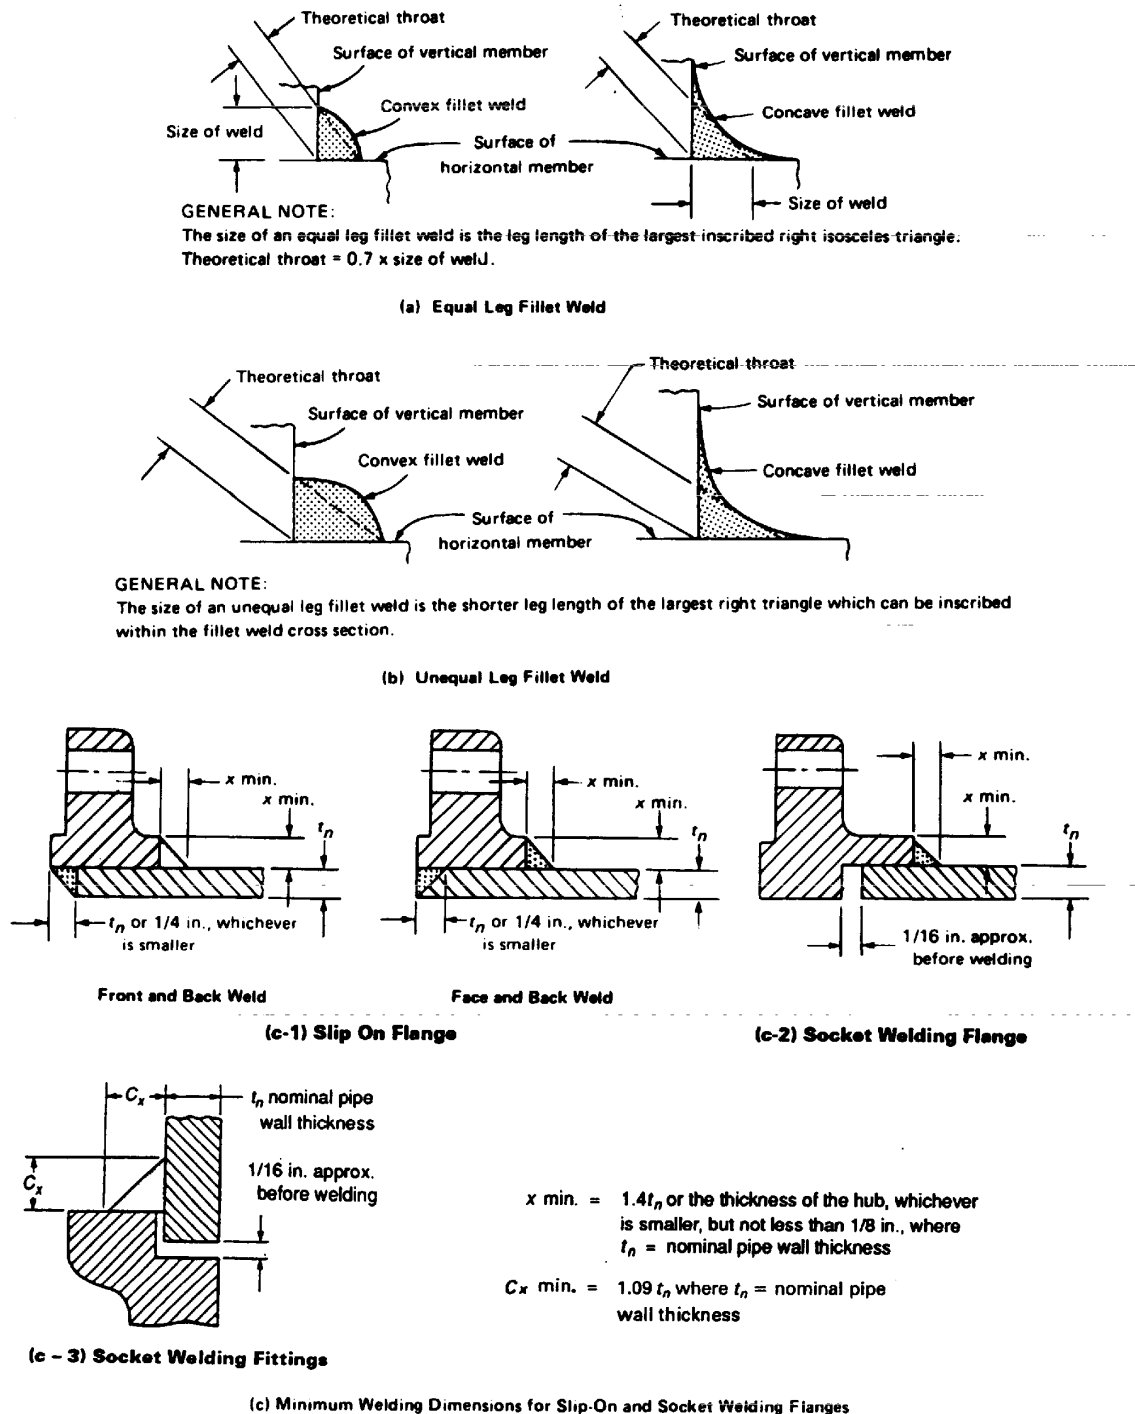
FILLET AND SOCKET WELD DETAILS AND DIMENSIONS
